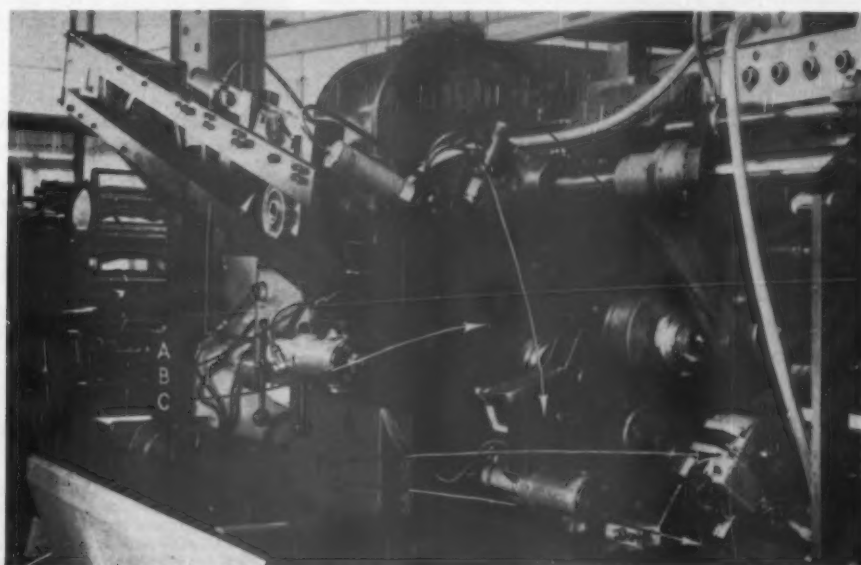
Wickman chucking automatic arranged for automatic loading and unloading. The component is machined on both sides in one machine cycle
